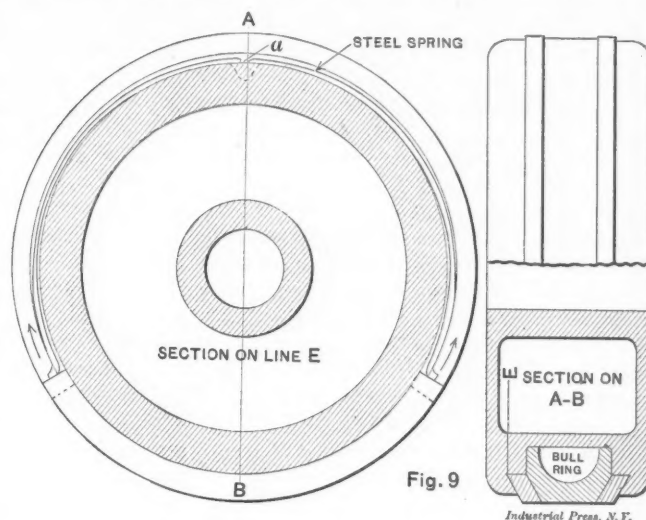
Piston having Skeleton Bull Ring and Beveled Packing Rings.
